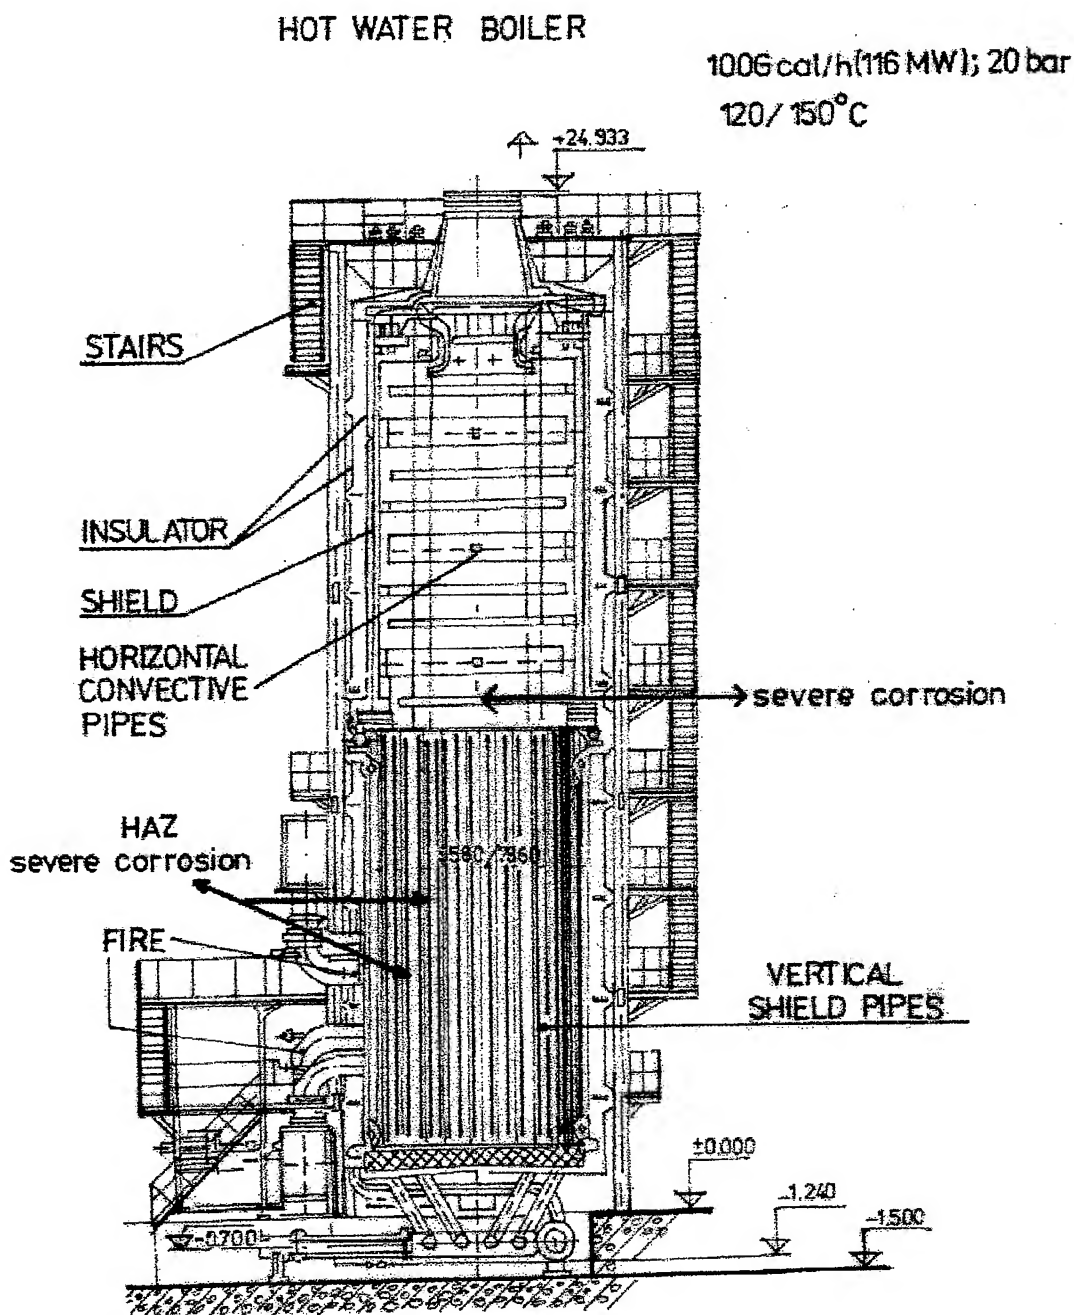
Schematic view of a hot water boiler of 100 Gcal/h and the most corroded parts in service
